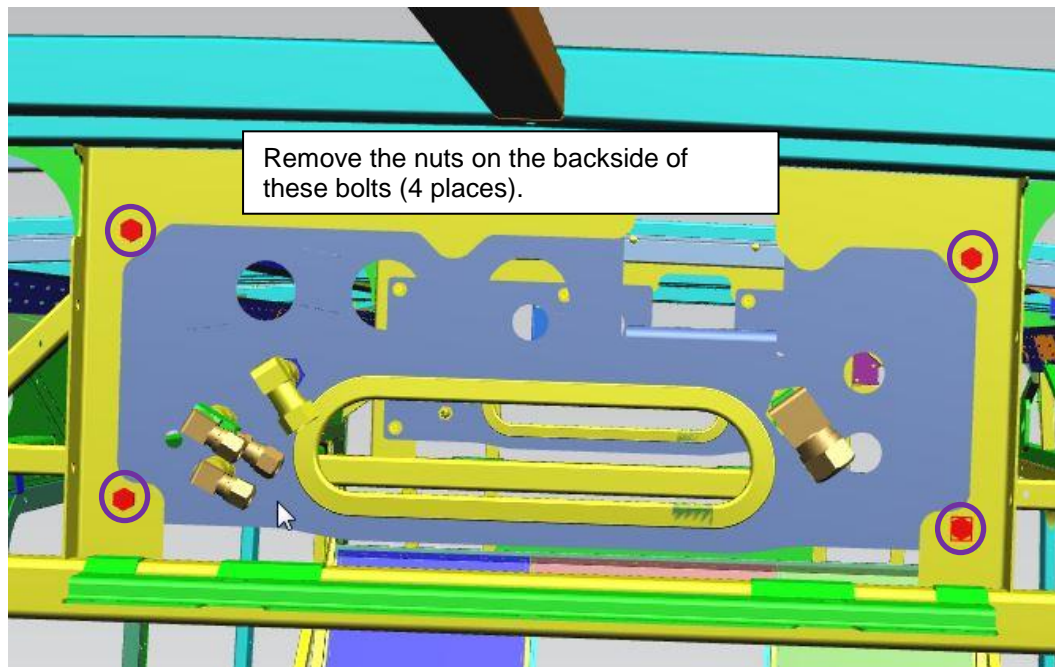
VIEW OF THE BOLTS THAT REQUIRE THE LOCK NUTS TO BE REMOVED
